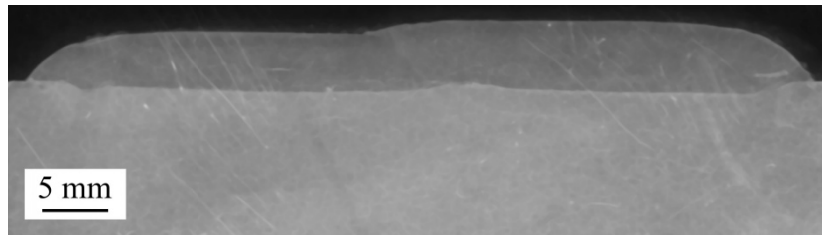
Cross-section of a deposit welded with welding parameters A, test 4
